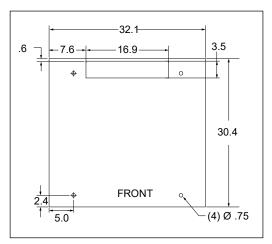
Mounting Dimensions (in inches) For SS4Bxxx Models
